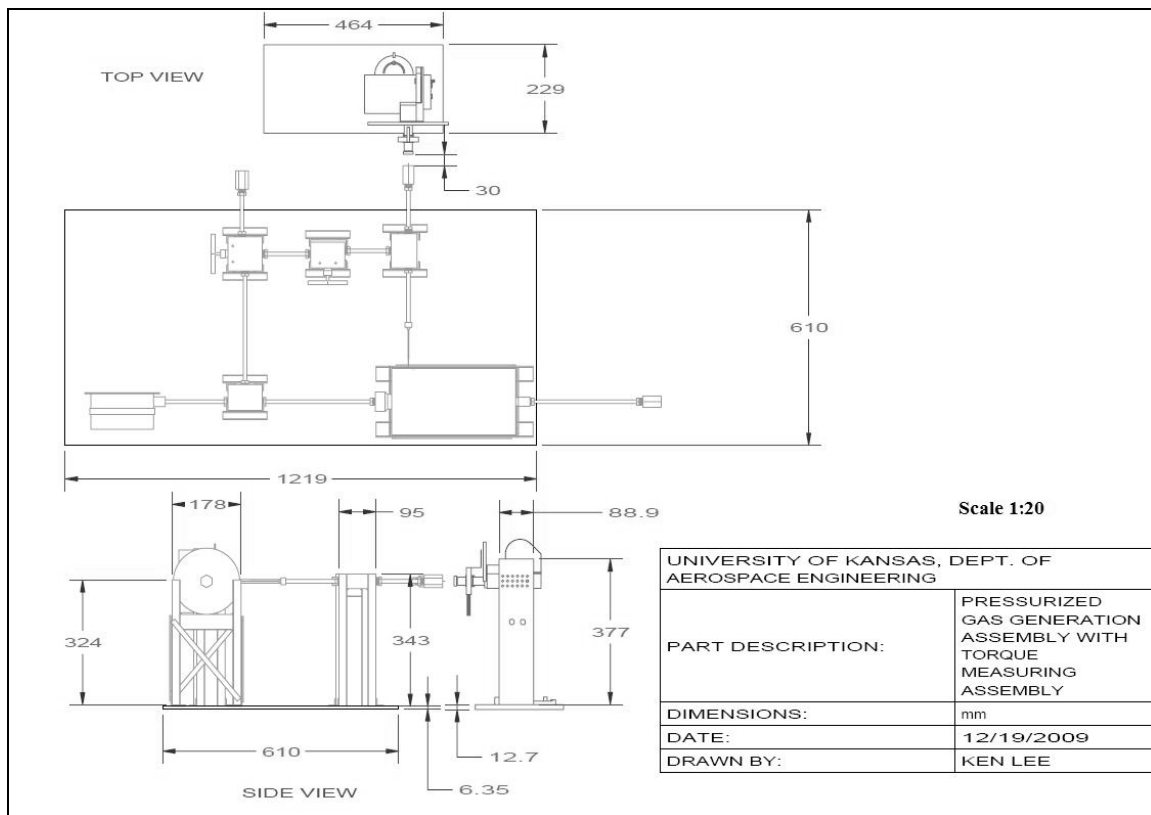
Top and Side CAD Views of the Pressurized Gas Generation and Torque Measuring Assemblies Drafted.
